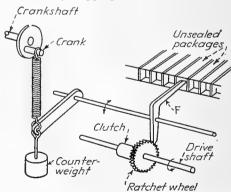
Arrangement used on some package-loading machines to stop the machine if a package should pass the loading station without receiving an insert. Pawl finger F has a rocking motion obtained from crankshaft, timed so that it enters the unsealed packages and is stopped against the contents. If the box is not filled, the finger enters a considerable distance and the pawl end at the bottom engages and holds a ratchet wheel on the driving clutch, which disengages the machine driving shaft.
